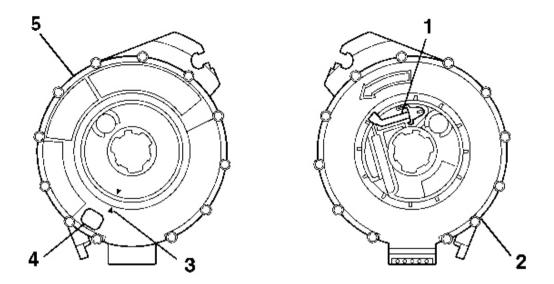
SIR Coil & Centering Window, Spring Service Lock Courtesy of GENERAL MOTORS CORP.
